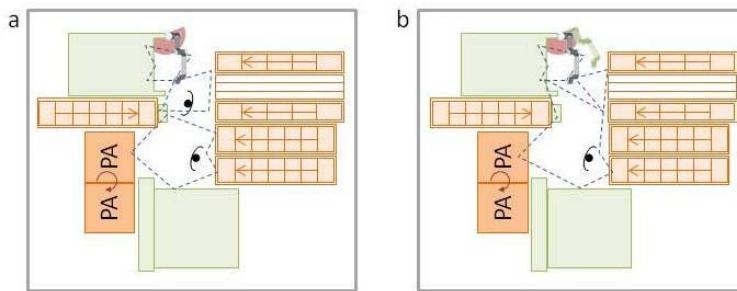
U-shaped assembly line working in fixed stations with a cobot (a) 2 operators; (b) 1 operator.
